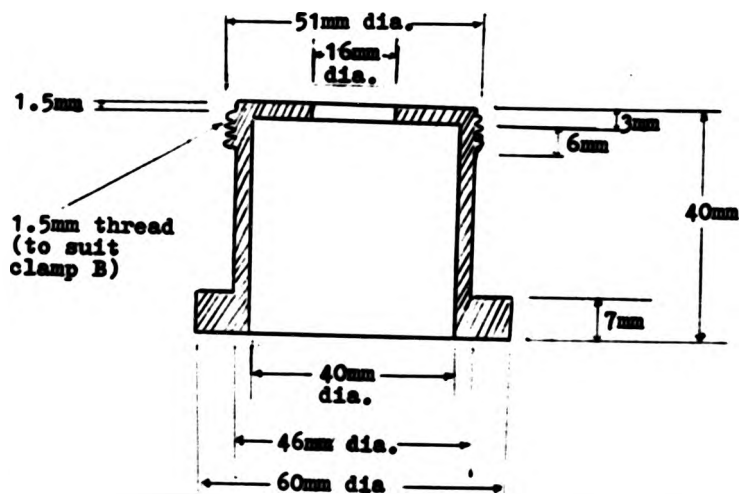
Dimensions of sample holder D in Fig. 4.4
